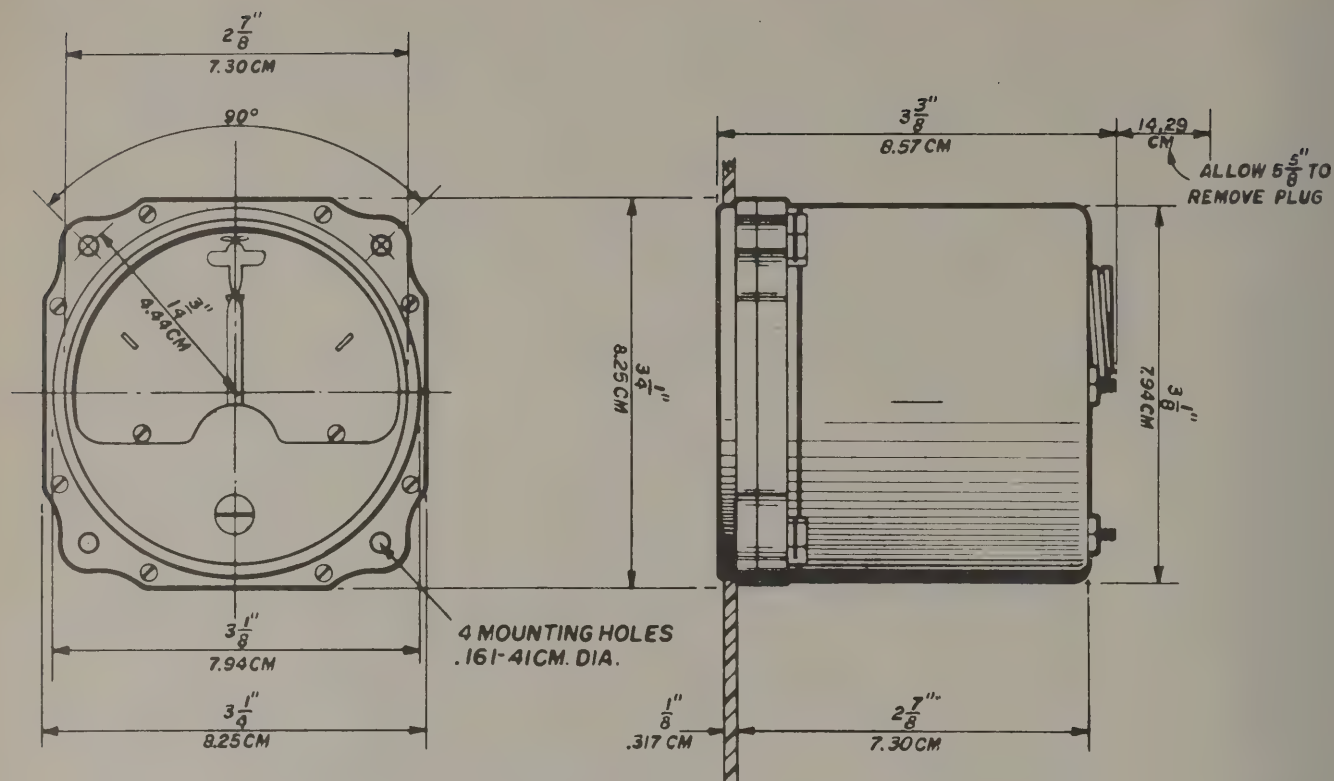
Type IN-4A Left-Right Indicator, Outline and Mounting Dimensions
